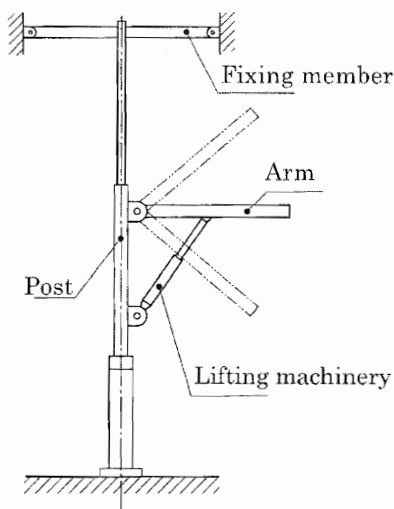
Example of stationary hoist fixed to the wall/walls, floor and/or ceiling
